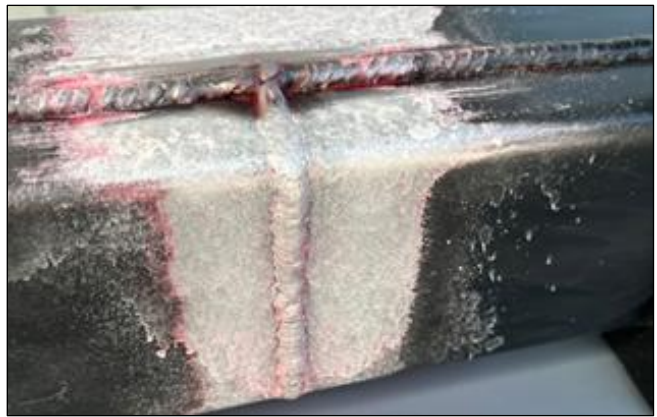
and 33: The DPT procedure is completed only after the final surface condition of the weld has been achieved.
